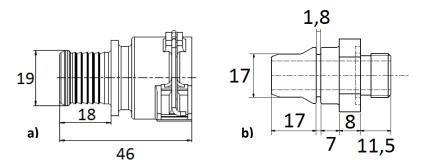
a) Mating connection b) Quick connector already screwed on the charger (cooling port)
